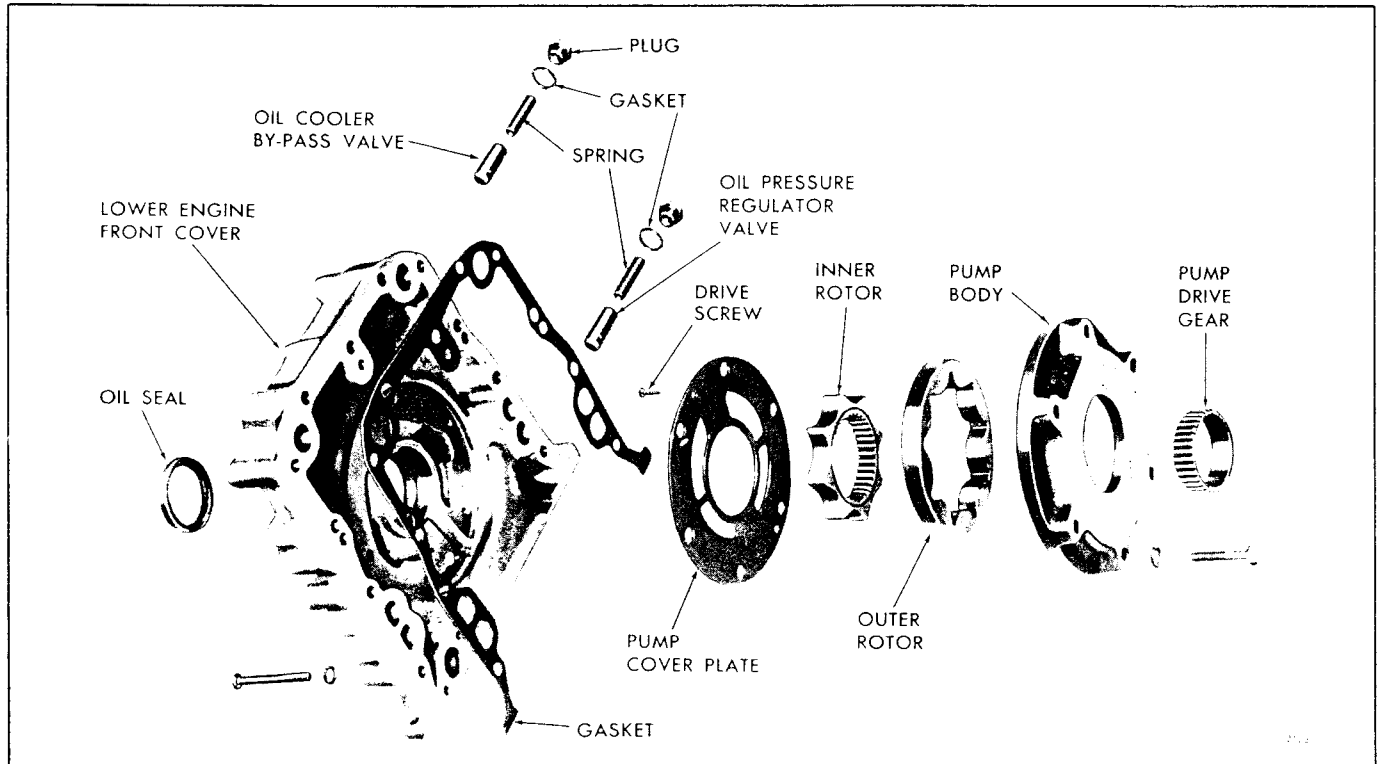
Lubricating Oil Pump Details and Relative Location of Parts (Former)
